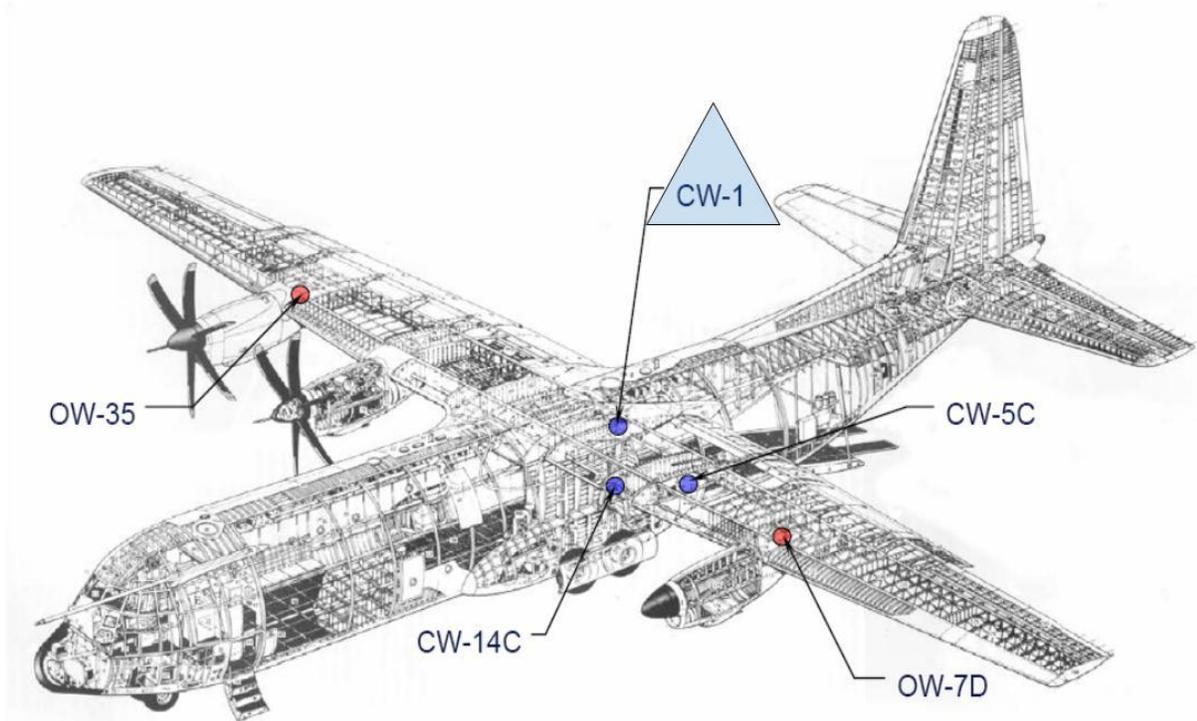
CW-1 Location of C-130 Lower Wing Surface
